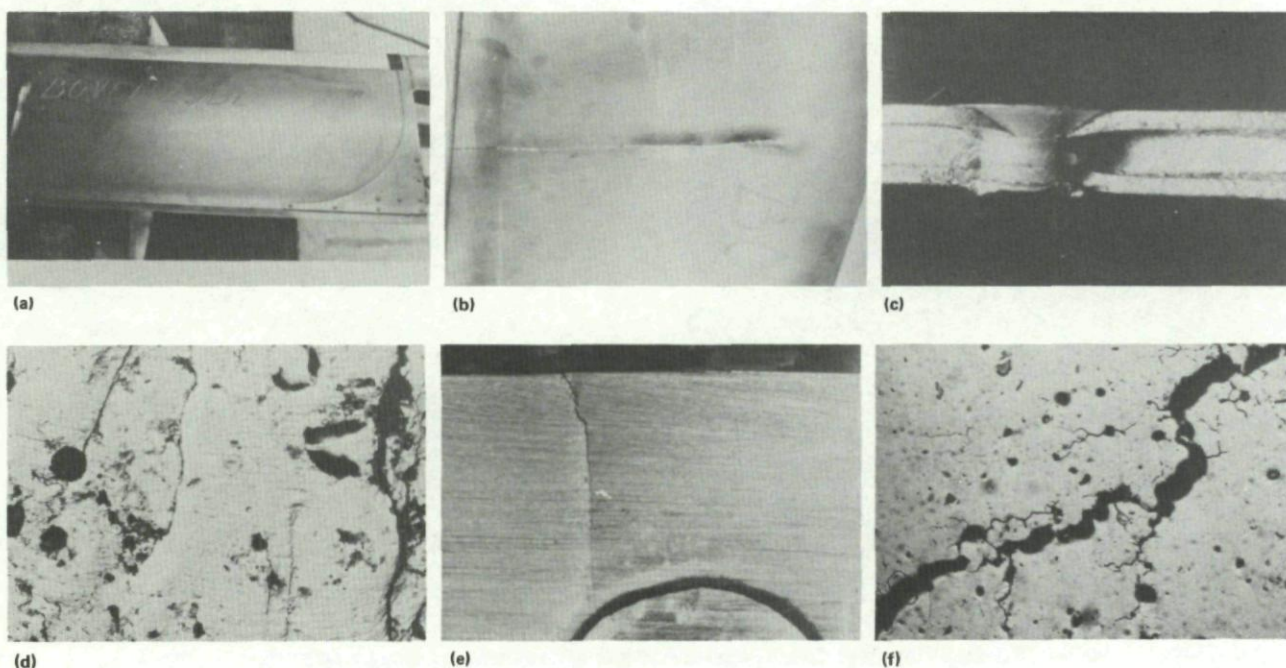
Intergranular corrosion and fatigue in a helicopter main rotor blade
